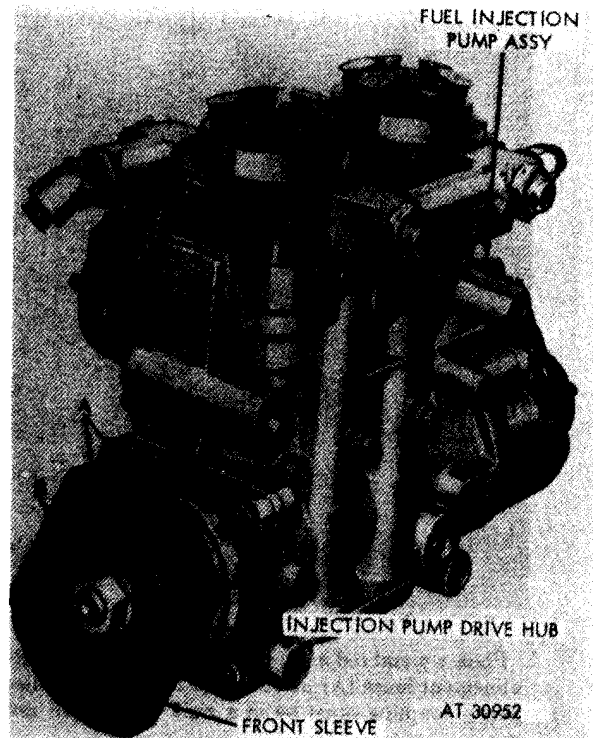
Removing fuel injection pump and preformed packing-splined coupler.
